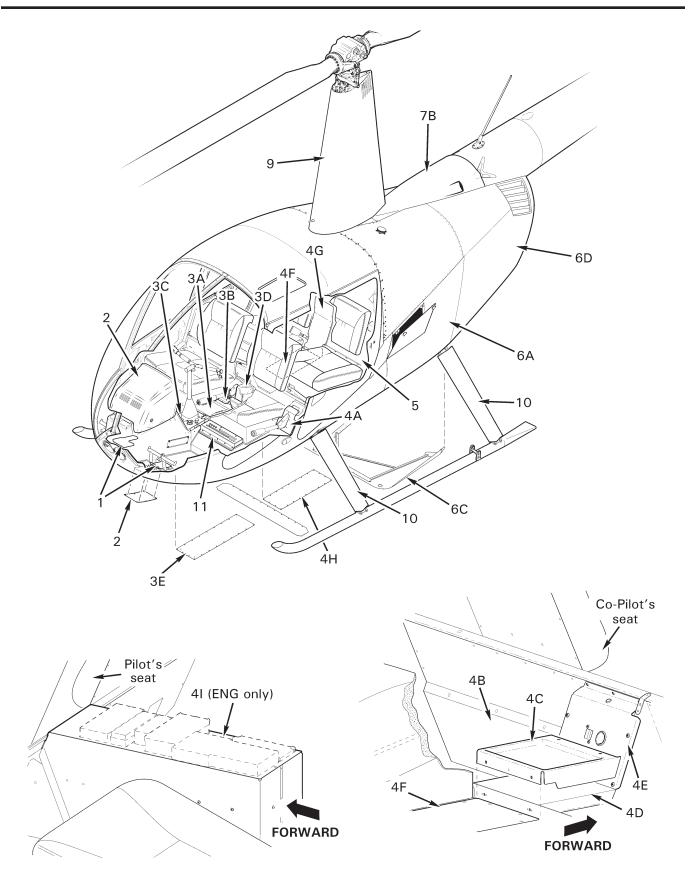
ACCESS AND INSPECTION PANELS
